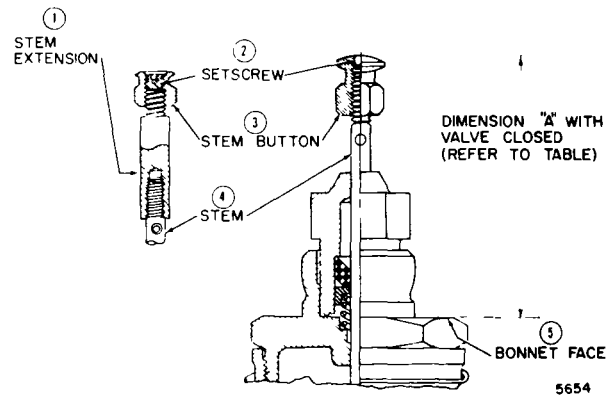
Method of Determining Proper Stem Button Adjustment with or without Stem Extension Refer to Table 4
